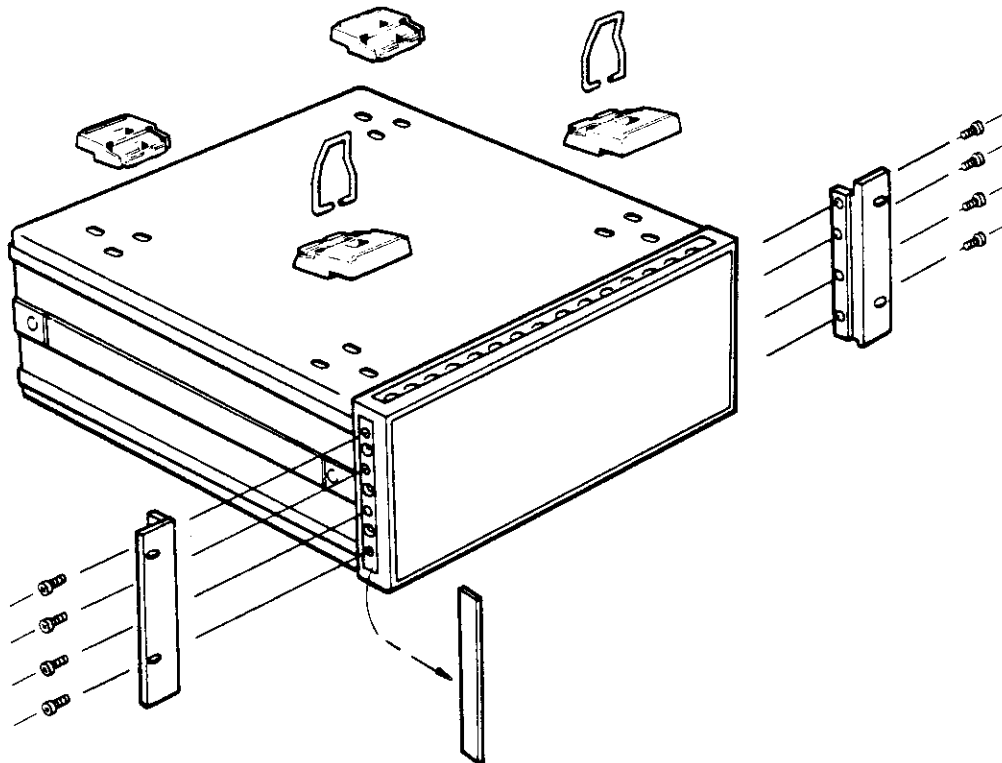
Chassis Slide Kit Mounting Instructions (Option 806) (2 of 2)
